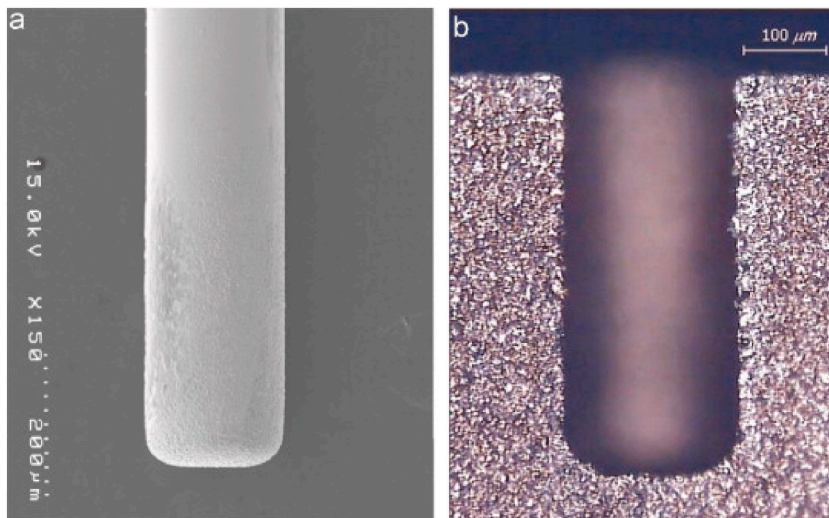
Scanning electron microscopy (SEM) image of electrode and workpiece when the drilling depth is  $580 \mu\text{m}$ : (a) tool and (b) workpiece [27].
